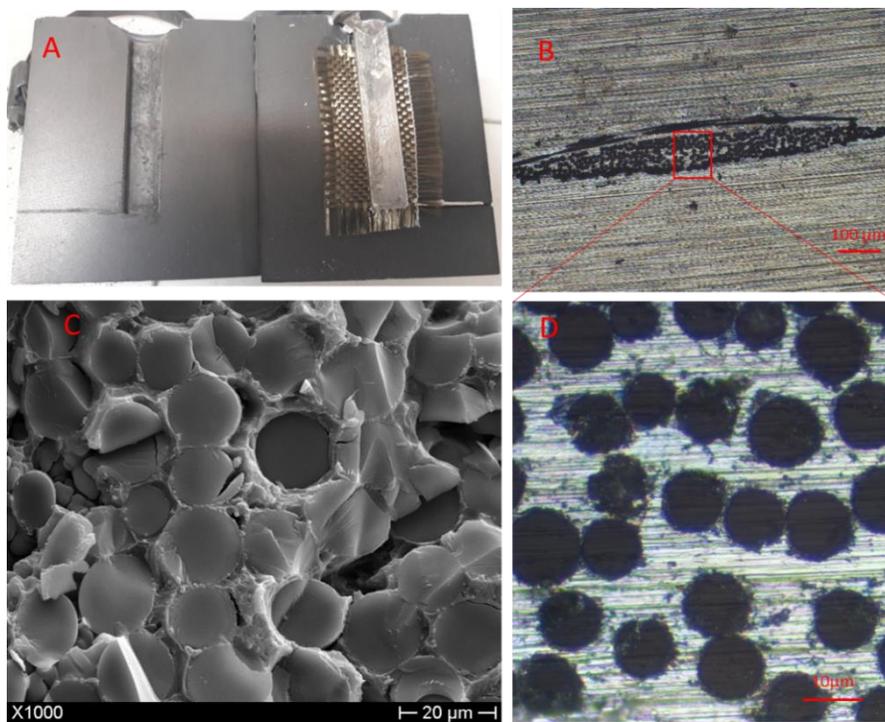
A) Sample after cast with long fillers; B) Cutting surface of sample with long fillers; C) Fracture surface of sample with long fillers; D) Enlargement of Cutting surface in B.
